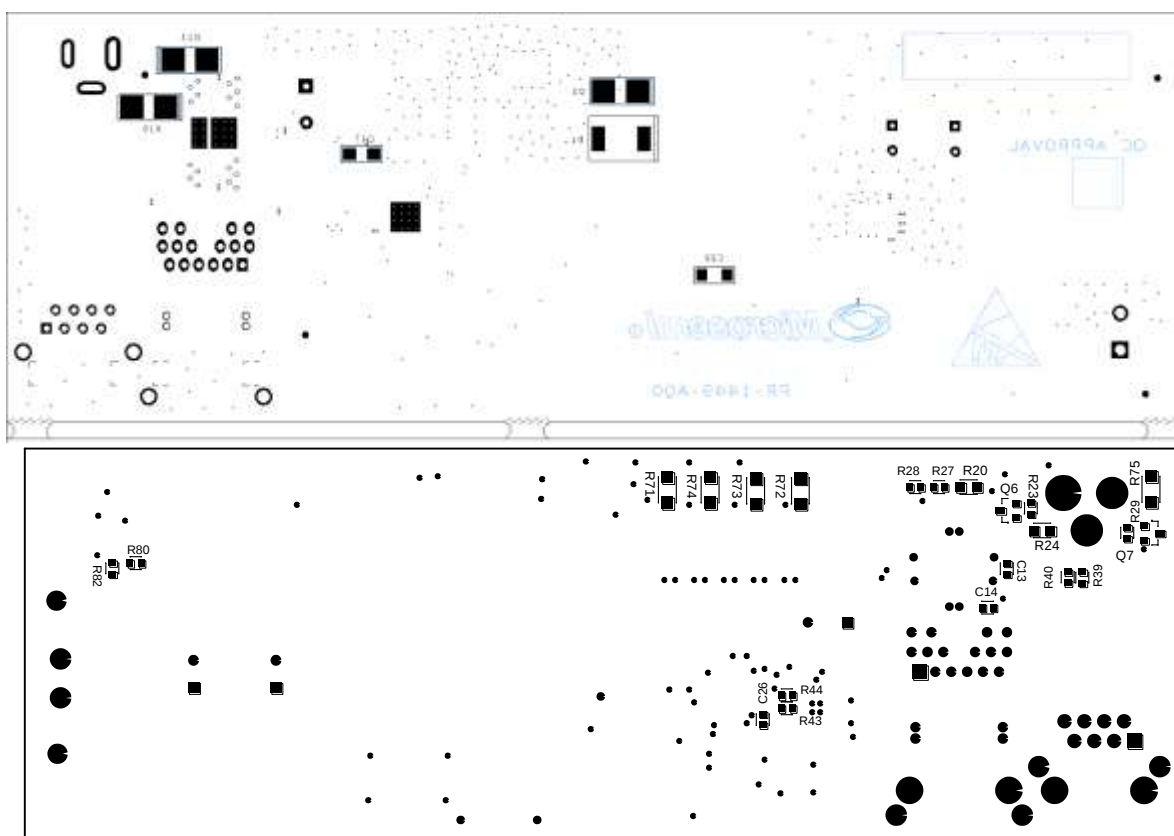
Bottom Silk and Solder mask (Image Looking From Bottom)
